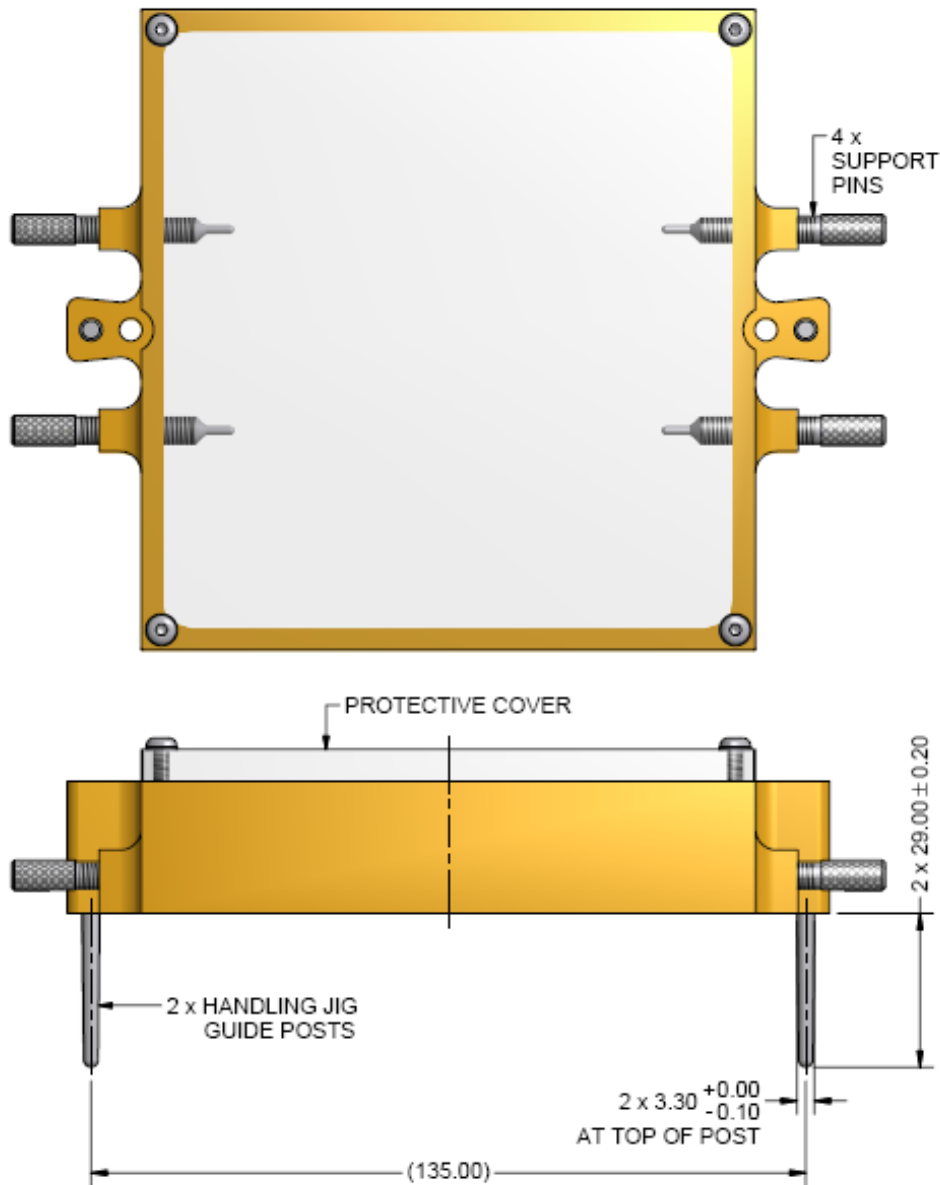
e2v jig used for device manipulation off the handling jig – 3D view.
